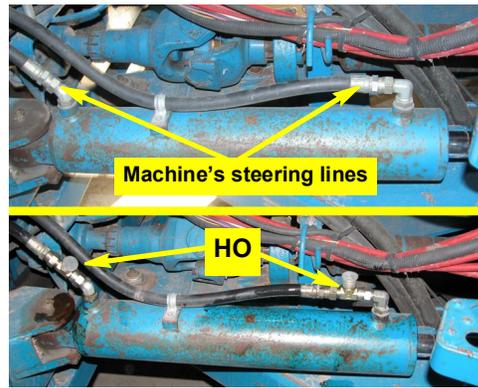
Steering hoses (top), run-tees installed and machine's hoses reconnected (bottom)
